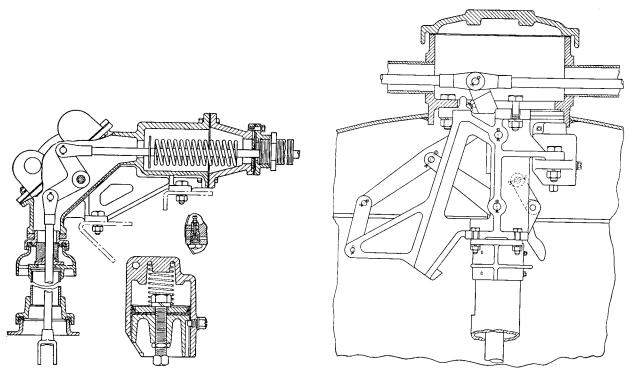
Main Assembly Details, Type G-2, 115,000 Volt Breakers
